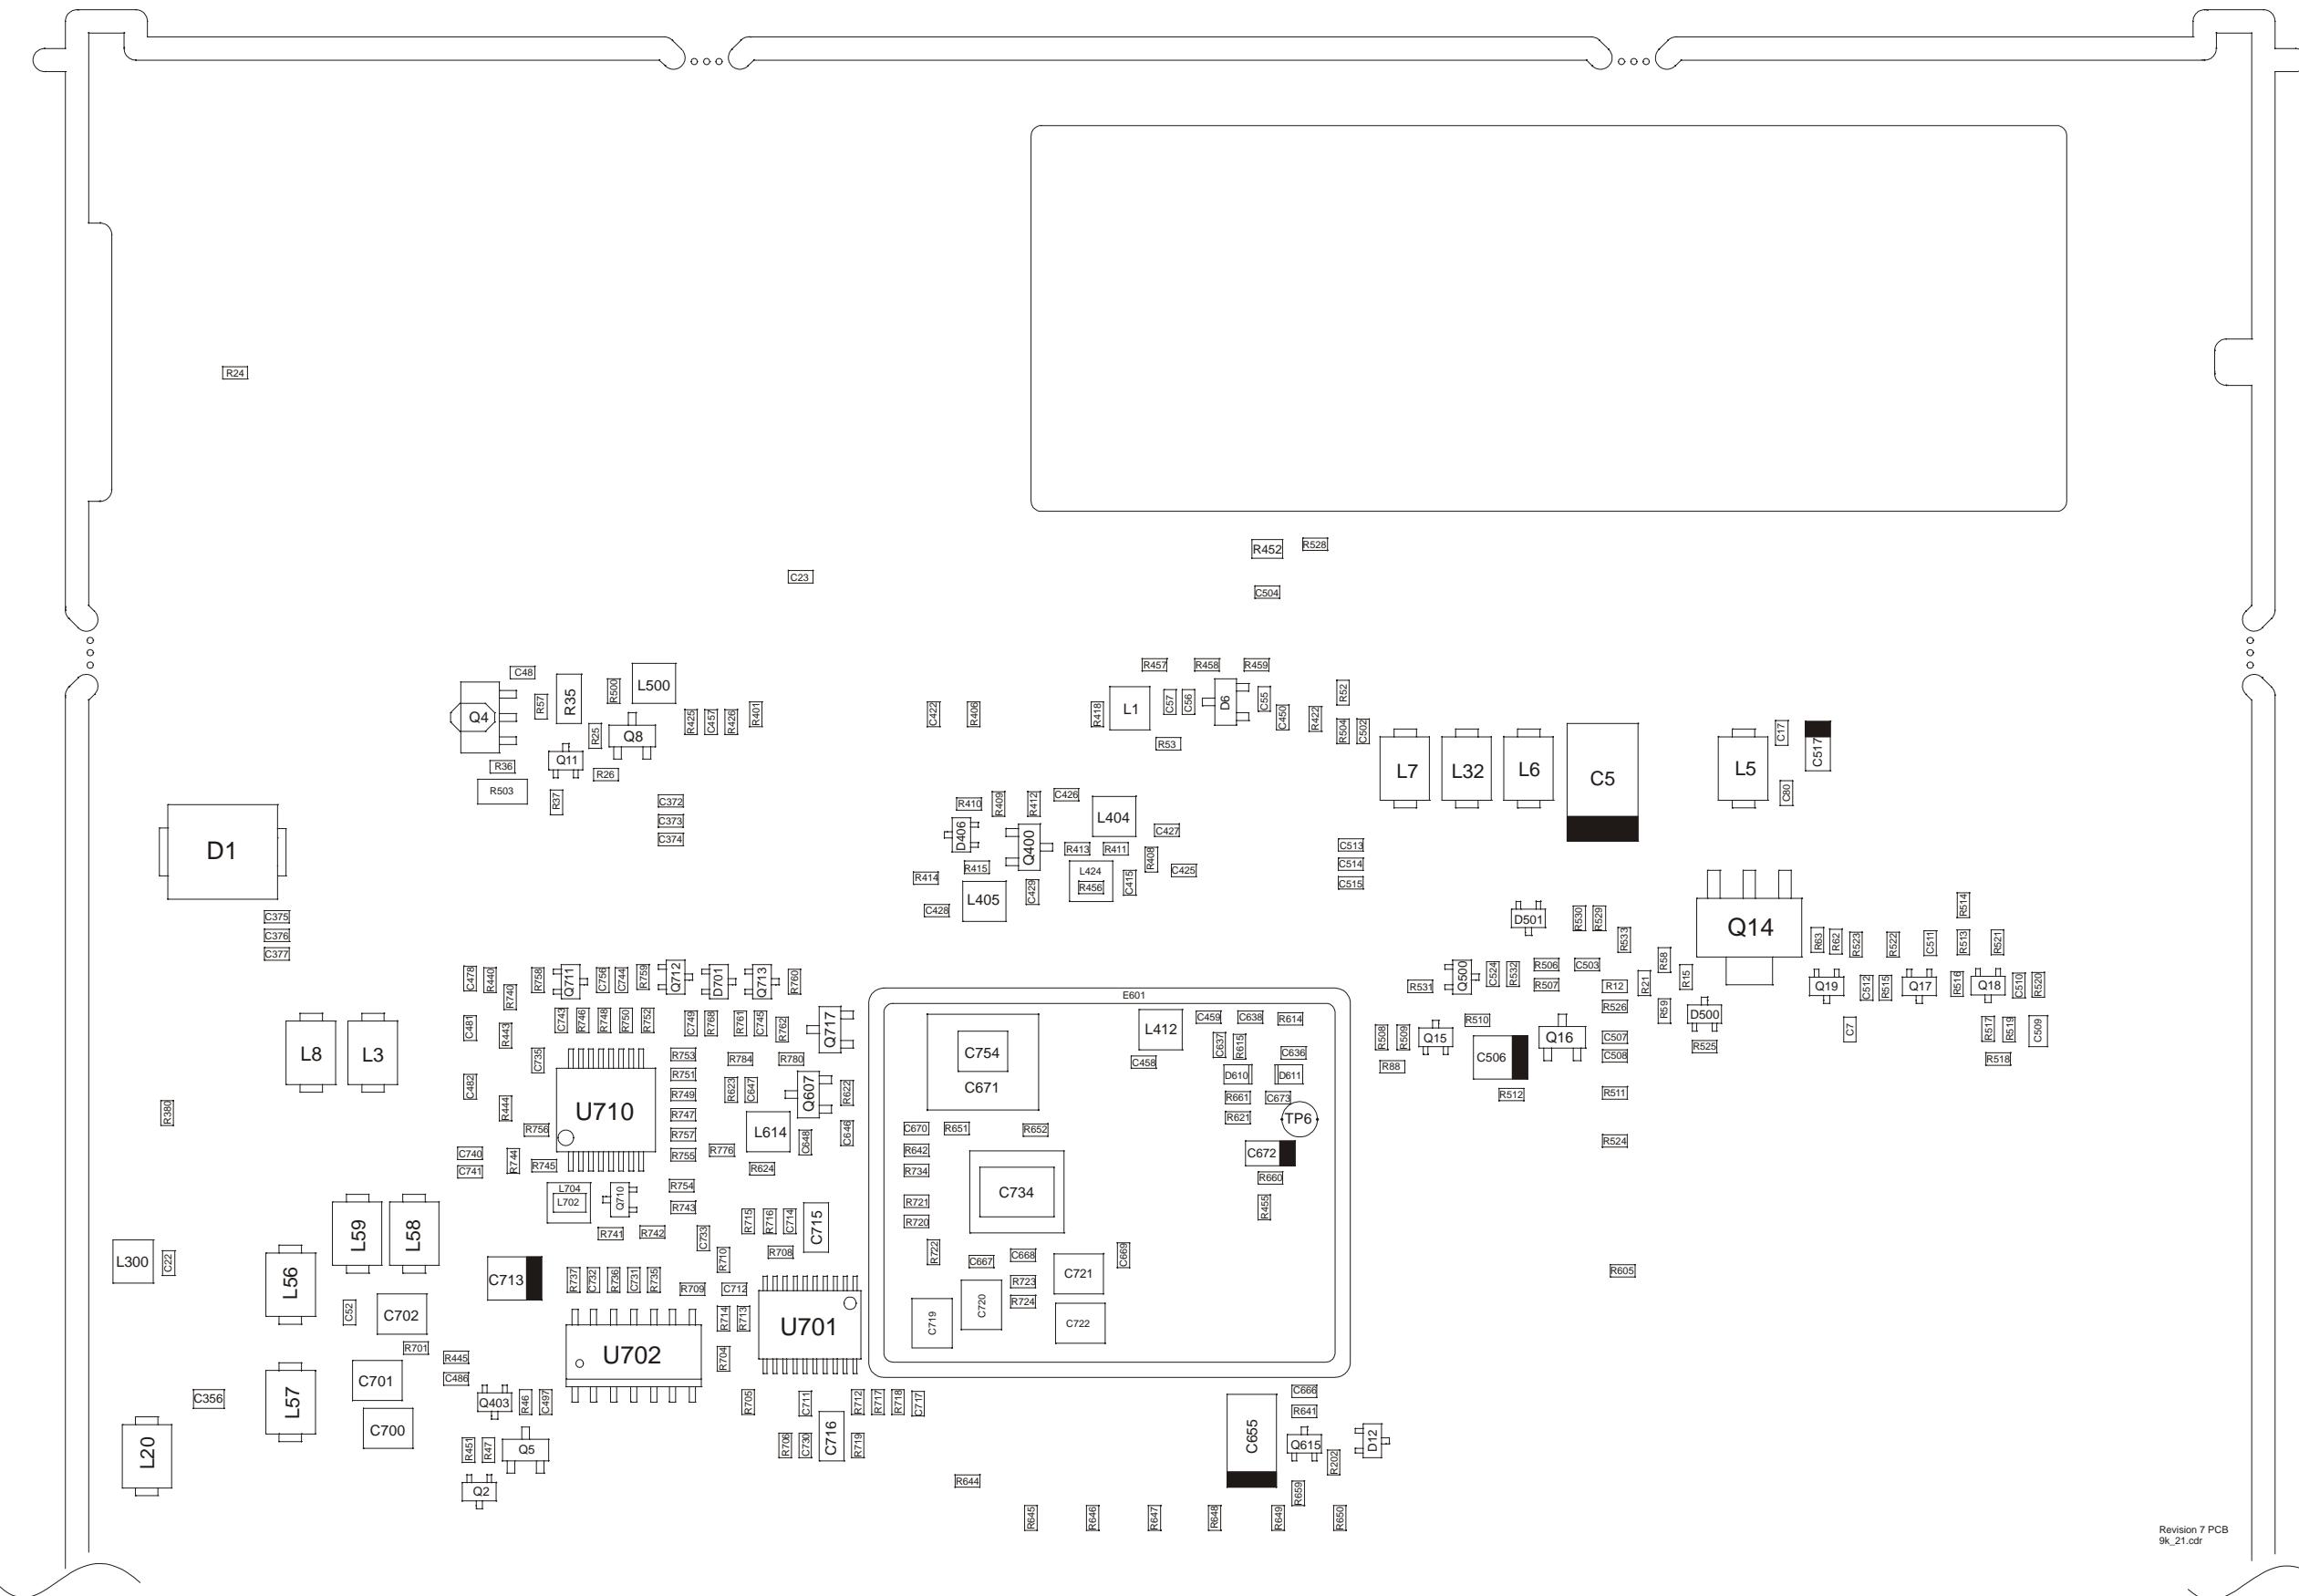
SRM9000 PCB Layout, Bottom (1/2)
